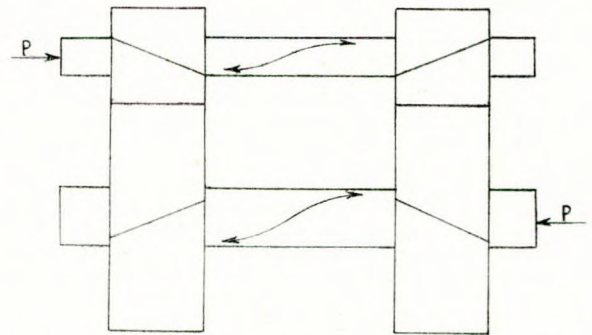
Power circulation in helical gears pre-loaded by axial thrusts applied one to pinion shaft and the other to wheel shaft
